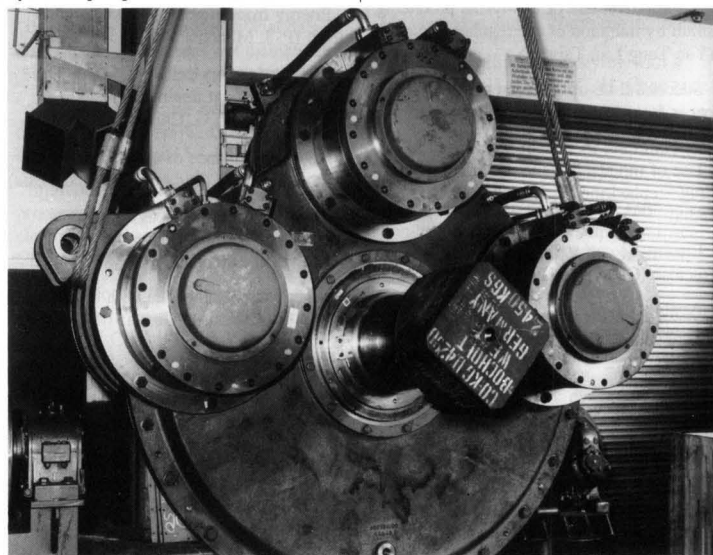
Gear box assembly in the workshop; the motors are flange mounted on the gear box casing, and the square end driving shaft may be seen
